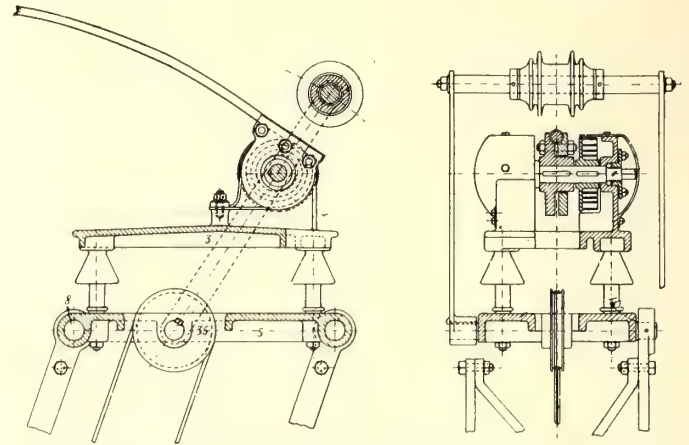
CONSTRUCTION DETAILS OF CURRENT COLLECTOR
